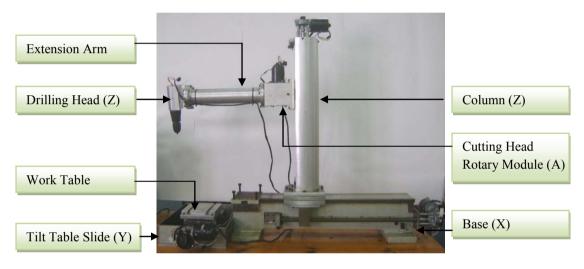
A Second Kinematically Viable Machine Tool for the Production of the Example Part
